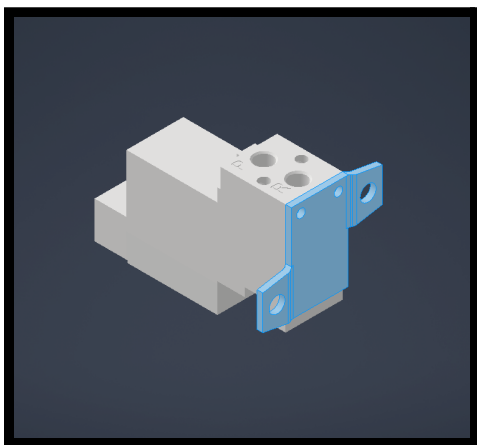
Standard solenoid, highlighted part is SMC's mounting plate
